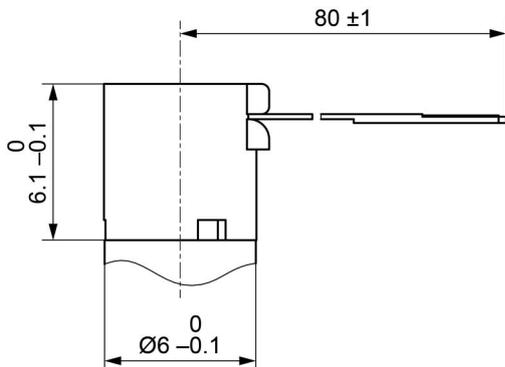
Dimensional Drawing [mm] – ENX 6 MAG
